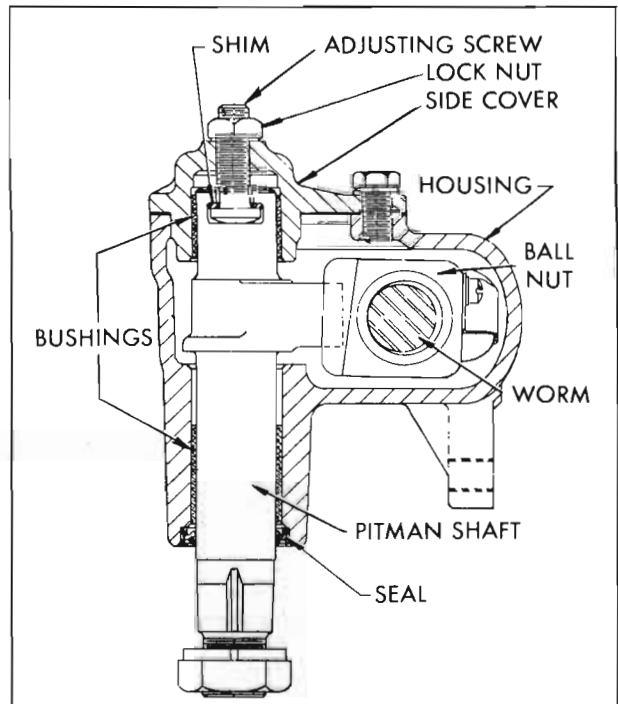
Steering Gear Pitman Shaft and Ball Nut
